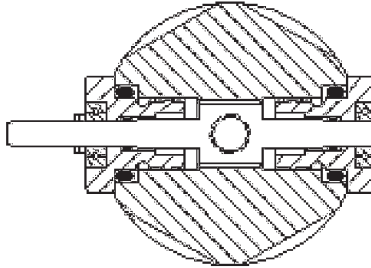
End-on cutaway view of controller body. As shown, the case would mount to the left of the body
